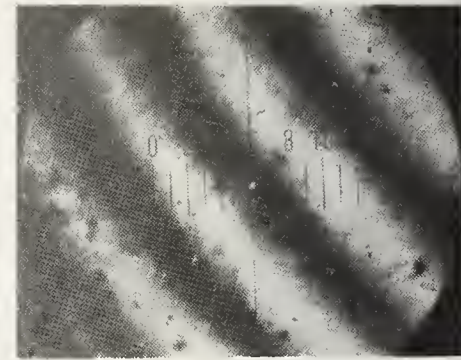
The surface finish of a 133-inch-radius mirror machined using dc torque motors to drive the lathe slides is better than the surface finish of the mirror machined using stepping motors.
